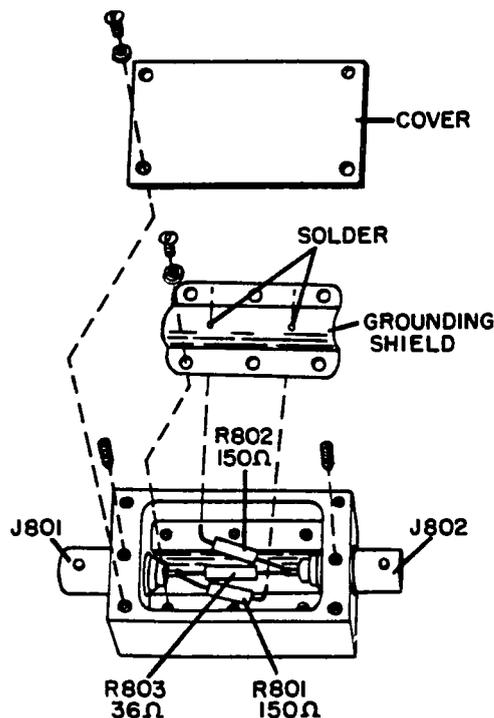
Attenuator, Fixed CN-399/TRM-1, (6 db), Exploded View
